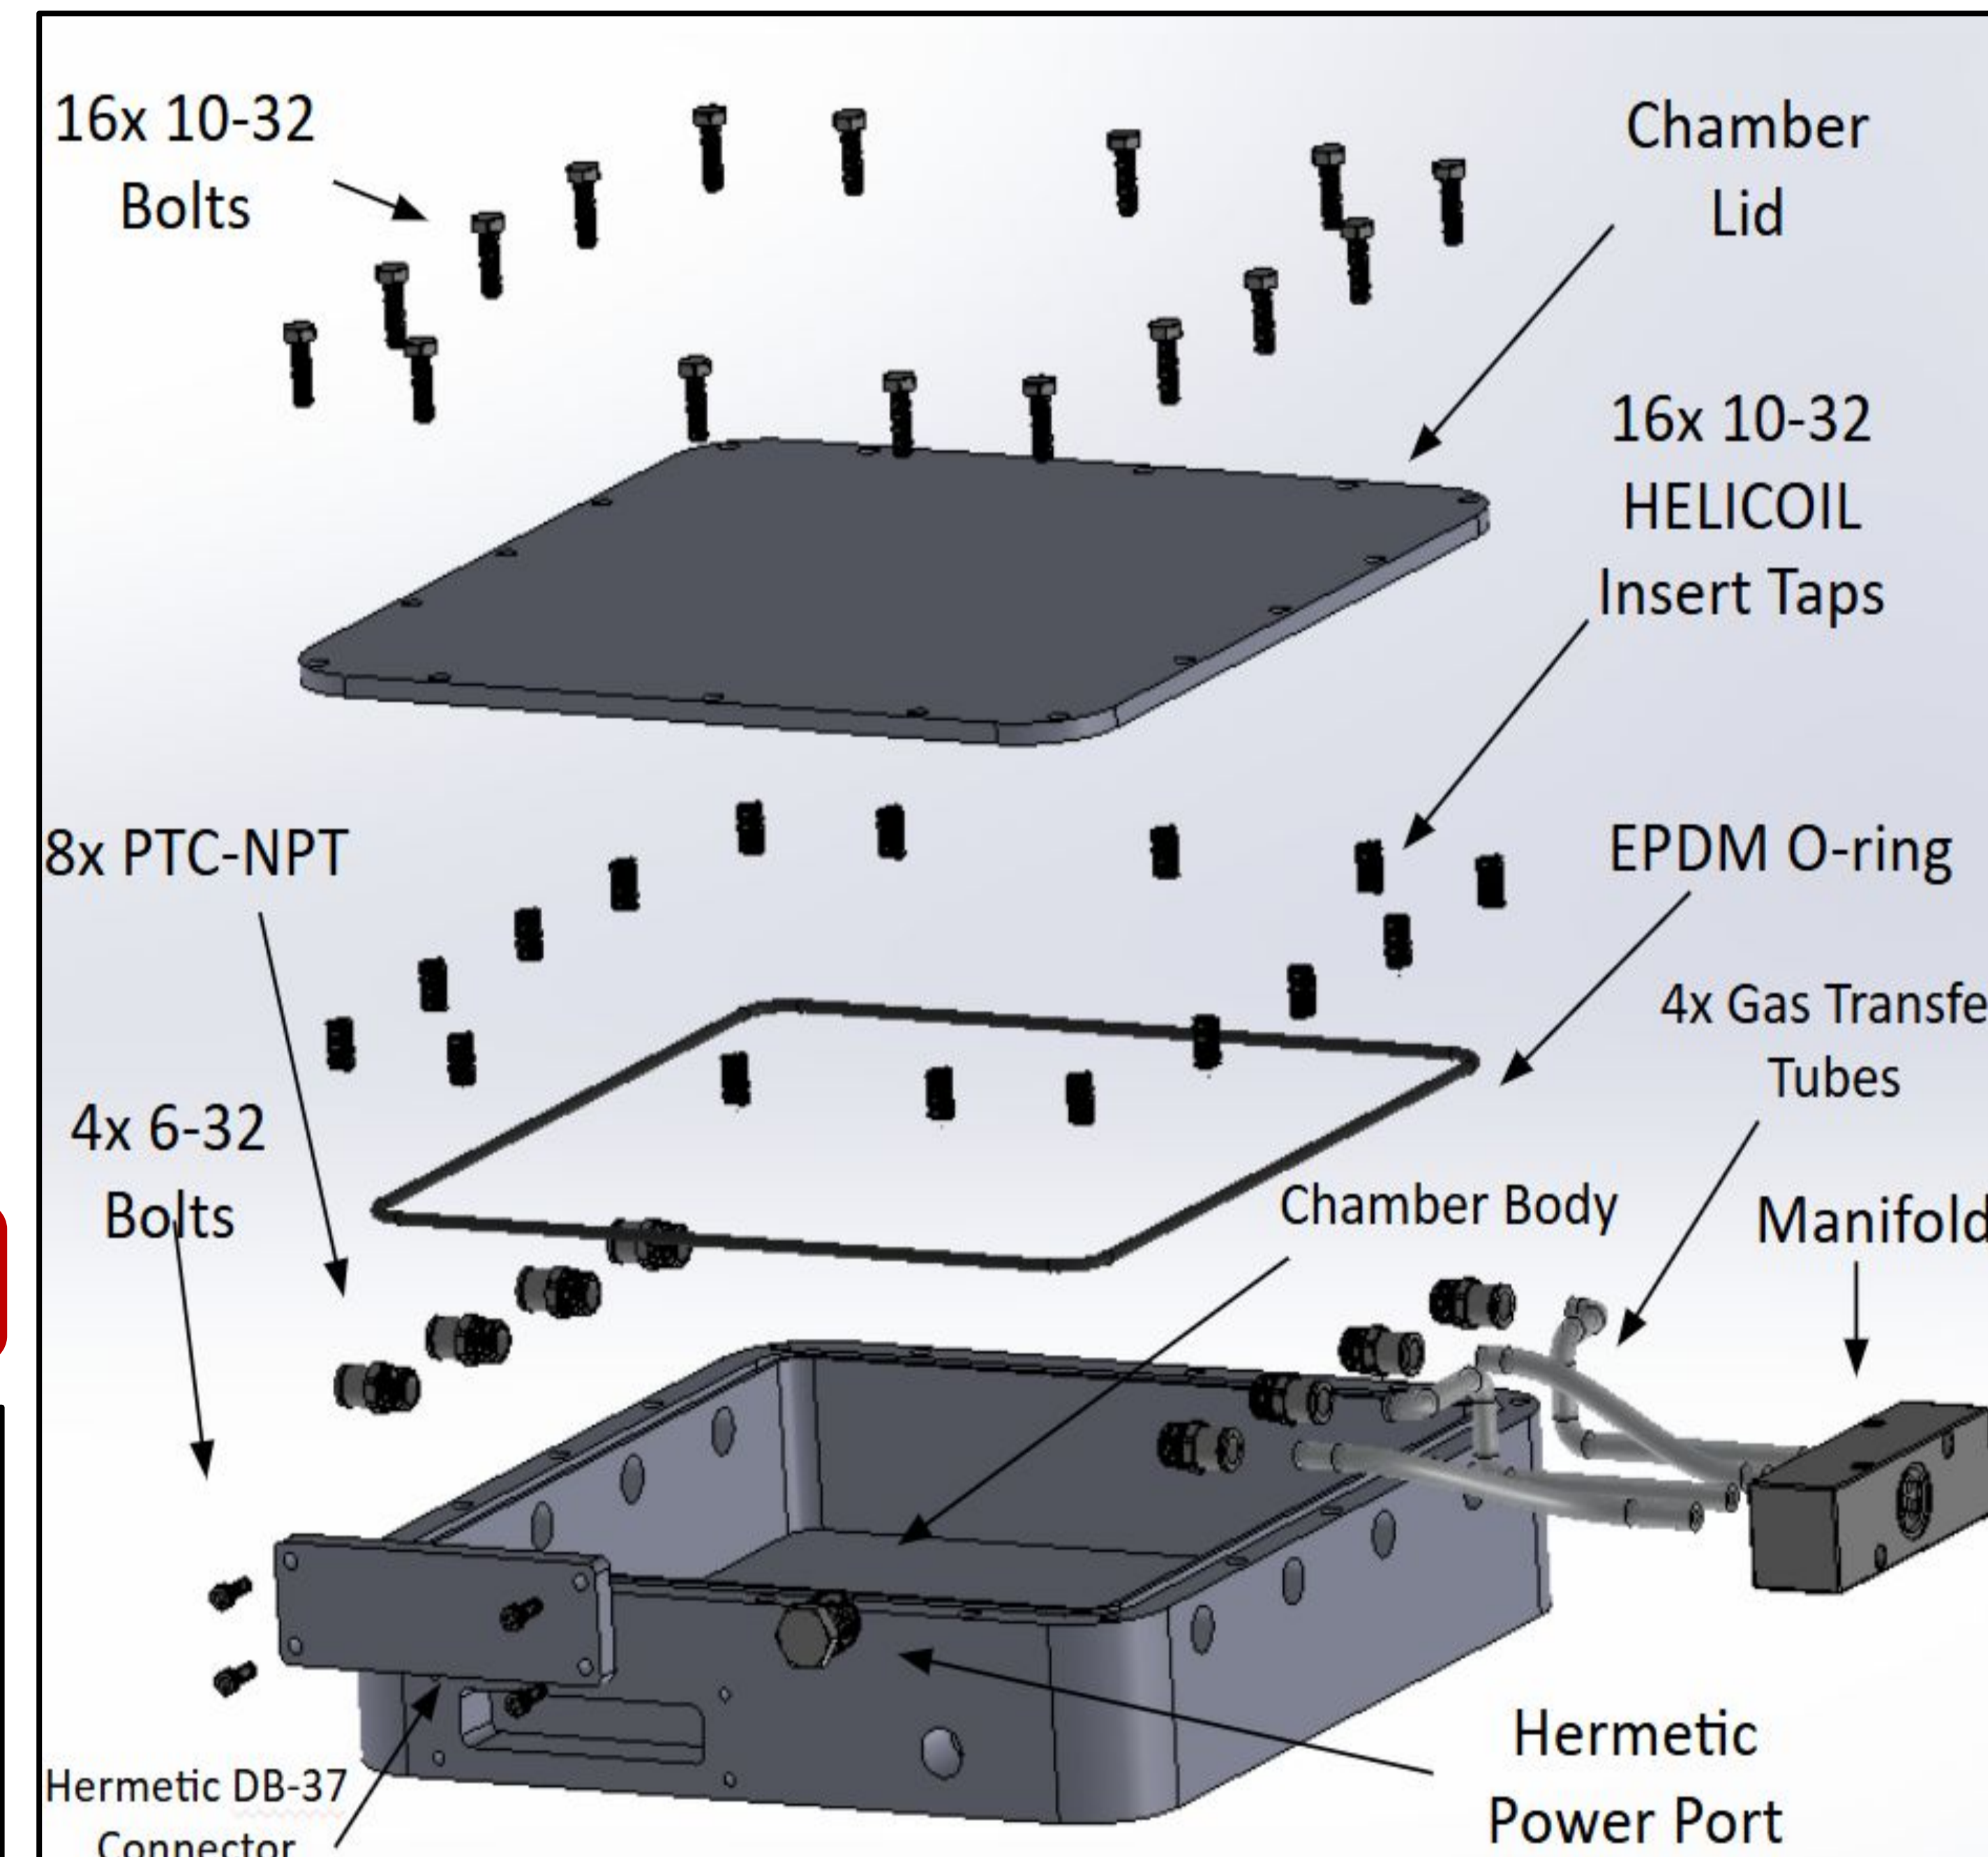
Exploded View of the Mechanical Assembly Created in SolidWorks.
